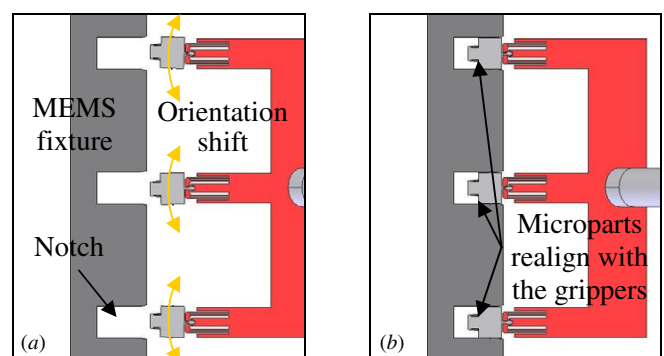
The parallel microgripper with microparts: (a) approaches the fixture; (b) inserts into the fixture.
